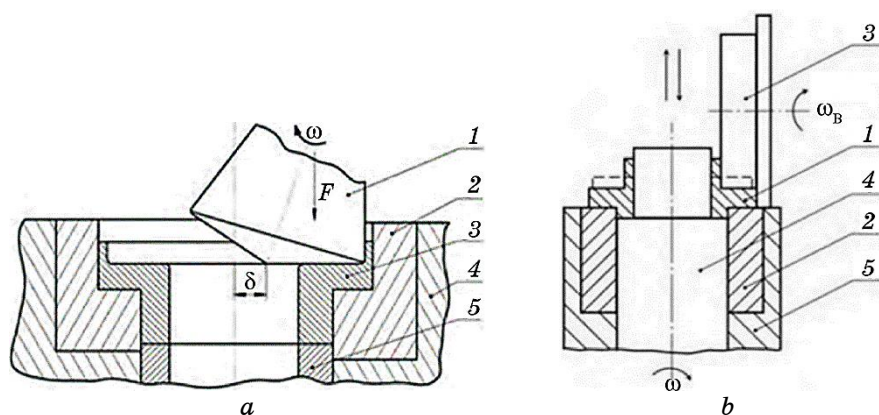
Schemes of extrusion and reverse extrusion of thin-walled elements by SHS method on the end face of a ring blank with conical (a) and cylindrical (b) mandrels: 1—blank, 2—matrix, 3—mandrel, 4—pusher sleeve, 5—spindle.
